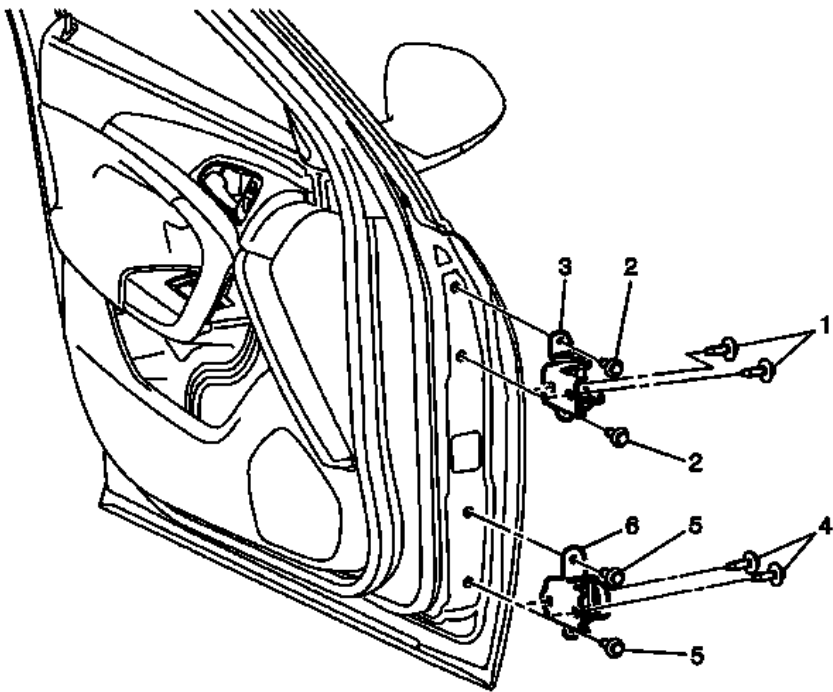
Front Side Door Upper Hinge And Lower Hinge
